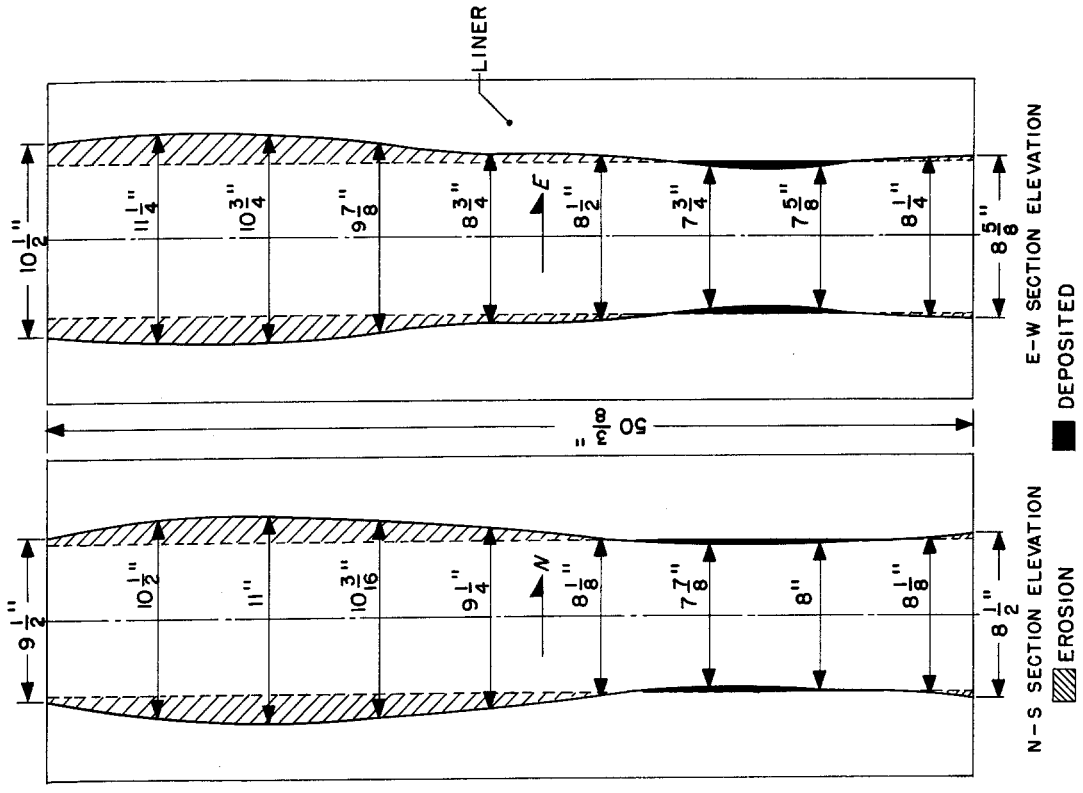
Refractory Condition After Test P-34, Gasifier 3.
